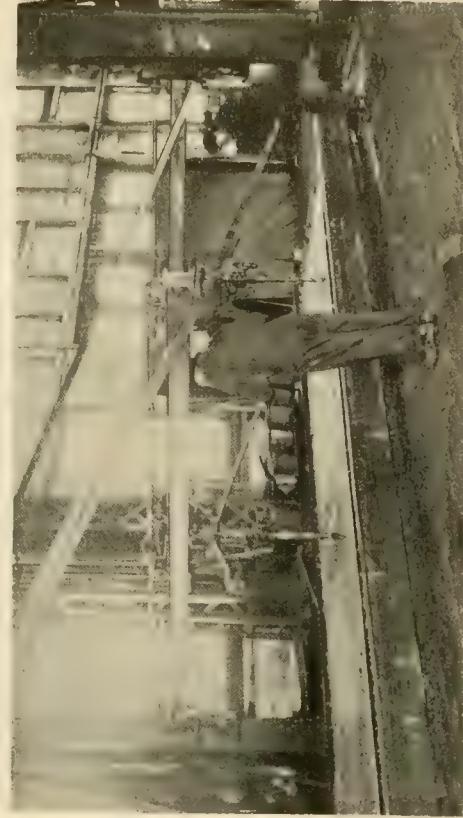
Reaming and Countersinking Rivet Holes in Ship Platting
